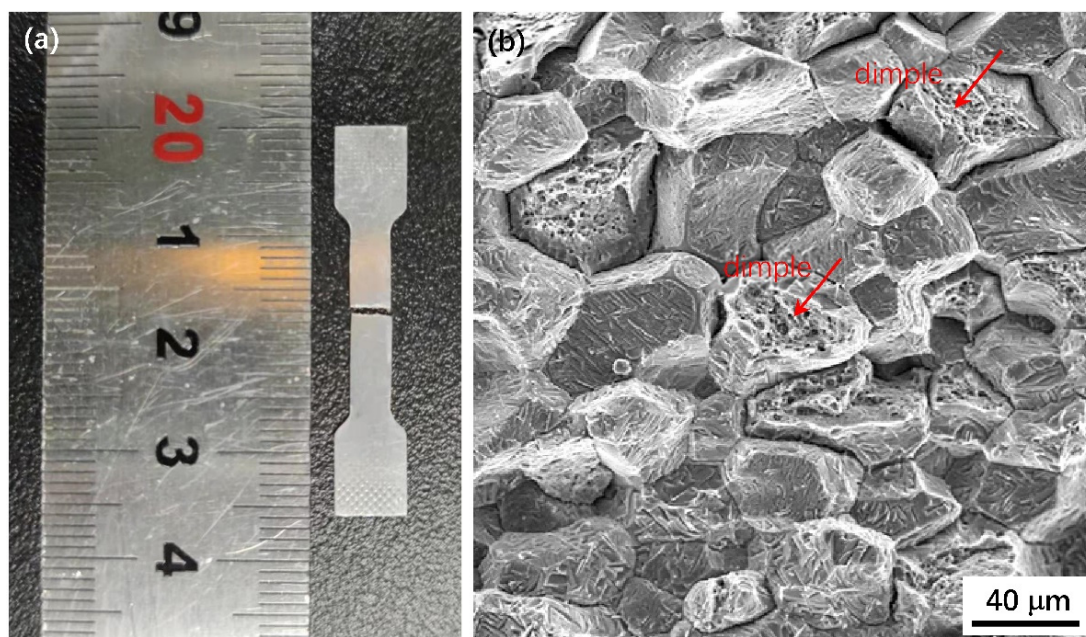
Macro-fracture (a) and surface morphology (b) of anneal-aged tensile specimen.
